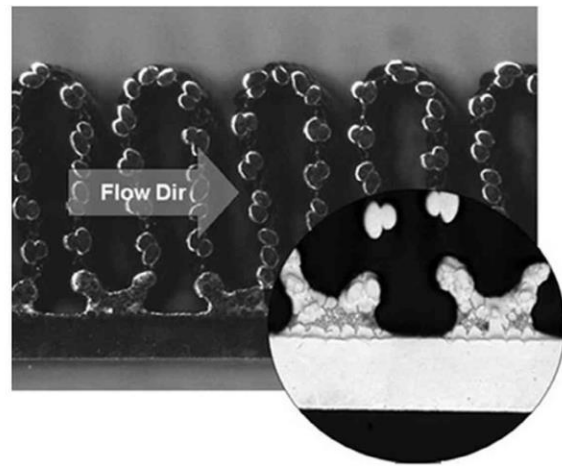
Folded wire mesh with a zoomed section of the brazed plate contact surface.
